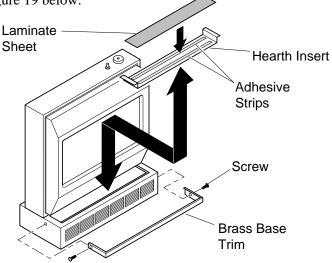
Placing Hearth Insert on Heater Base and Attaching Brass Base Trim
